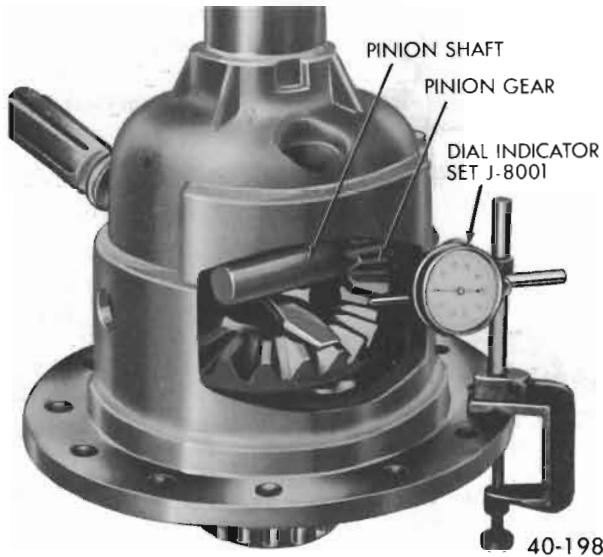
Checking Side Gear to Pinion Gear Backlash
